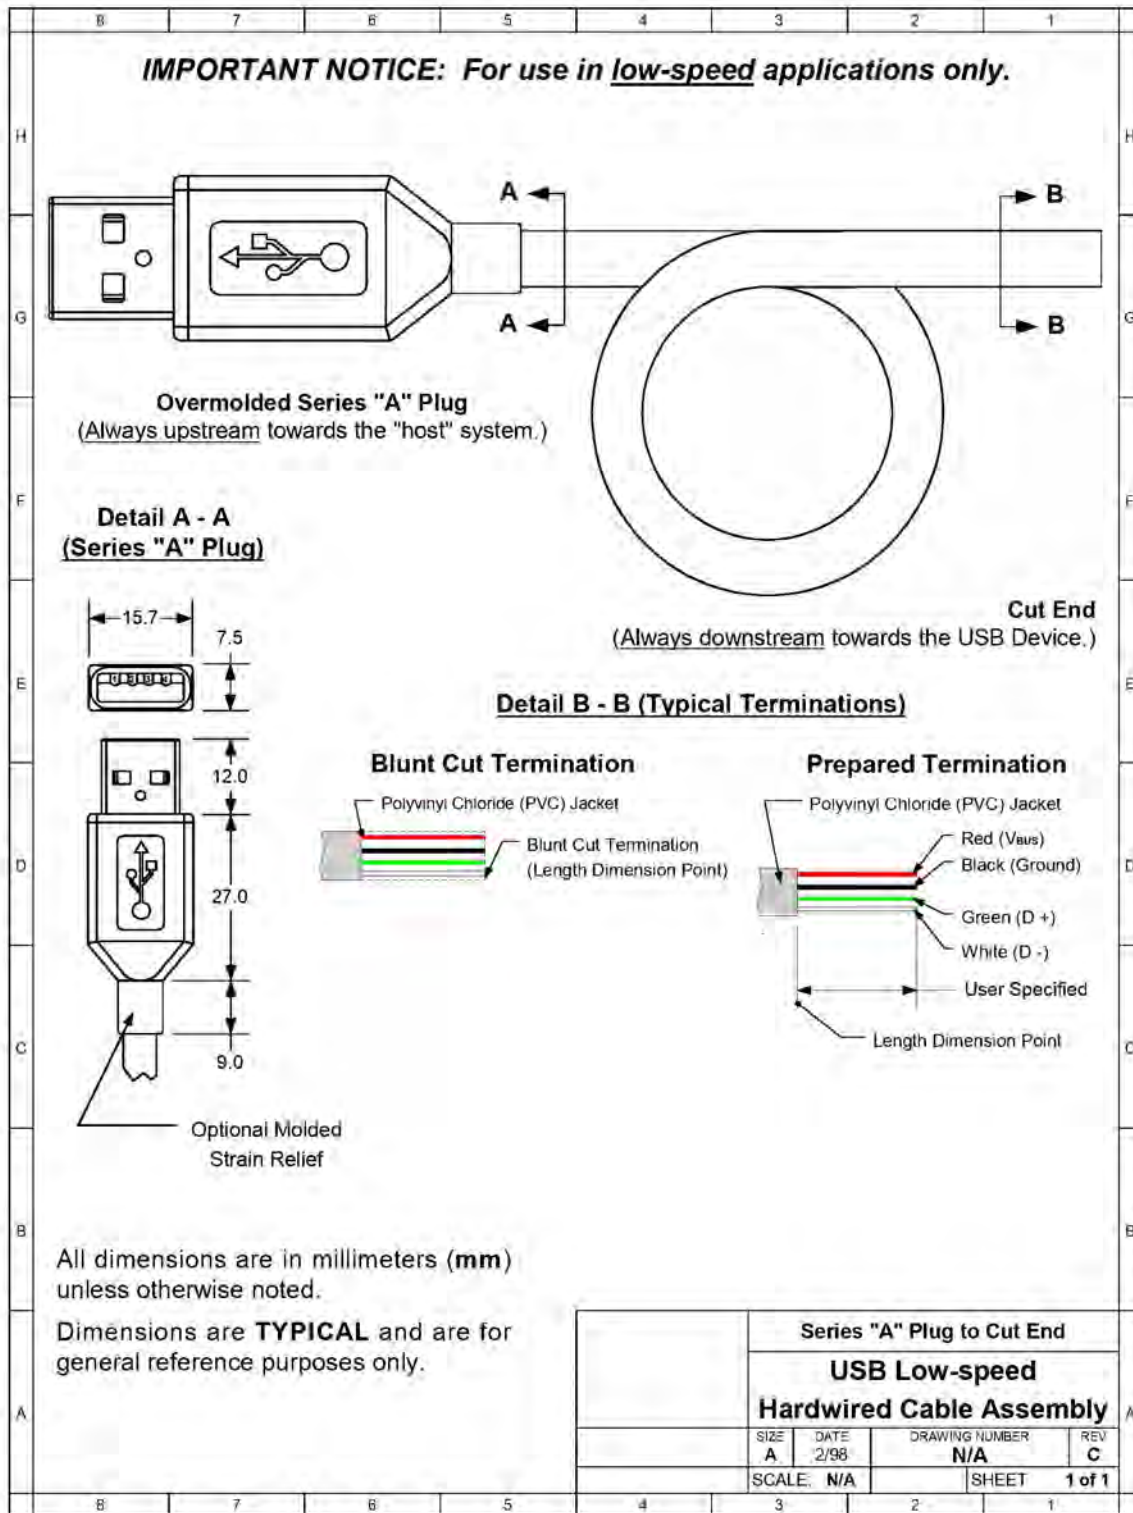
USB Low-speed Hardwired Cable Assembly
